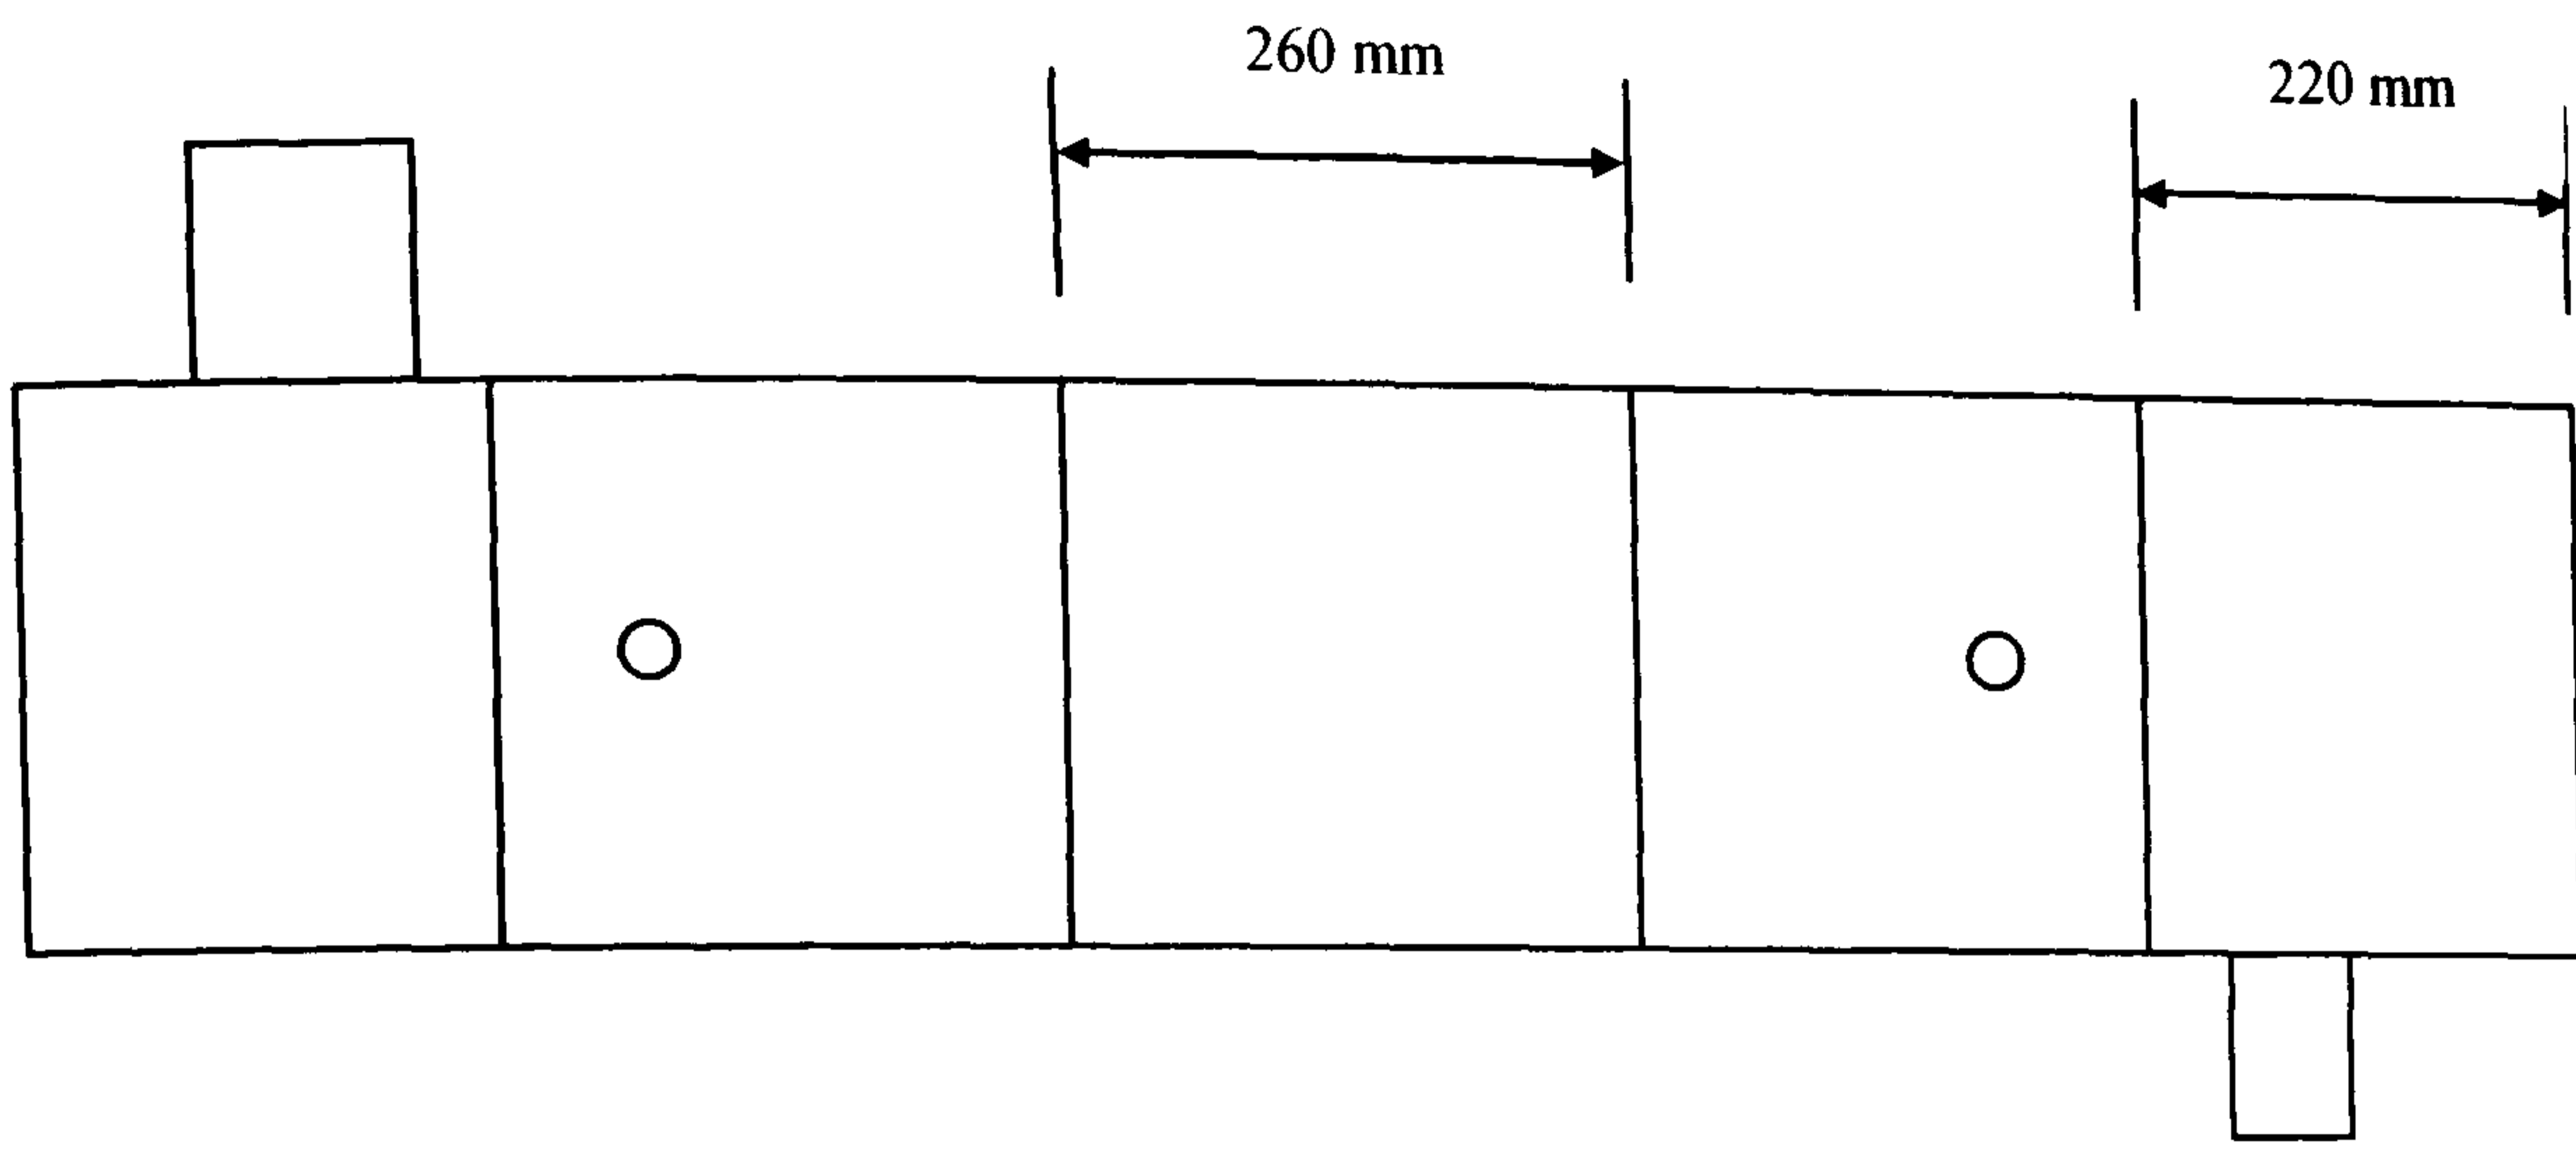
Shellside Baffle Layout – Test 3 (Vertical Cut)
